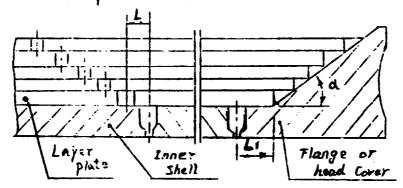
The multi-layer bundle-up vessel with dislocation of circumferential weld
